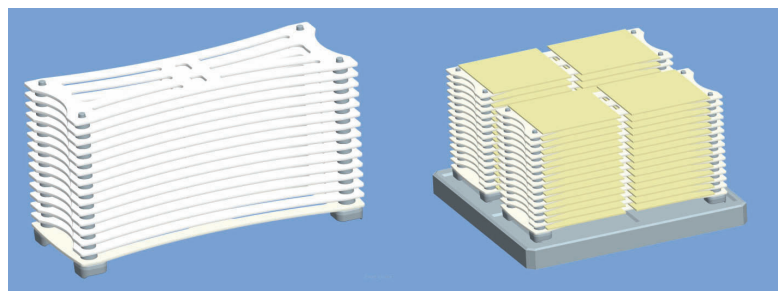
a, b Stackable butterfly rack system for MLCC firing; left: SC100RG- “butterfly racks” (3 mm, RSiC) with synthetic mullite coating assembled to a stack (patented design [6,9]); right: double stack with ZrO₂ coated mullite substrates, all placed on a mullite PB pusher batts
